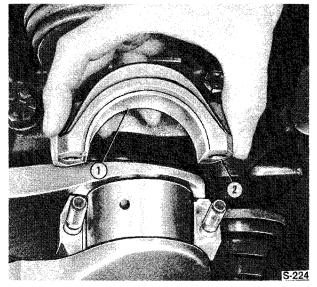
Connecting Rod Bearing Cap Removal 1. Bearing Liner 2. Bearing Cap
